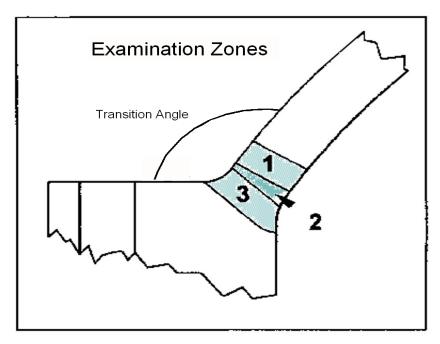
Cross-sectional view of Weld WH-7 showing weld area (2) and base metal examination (1 and 3) zones.
